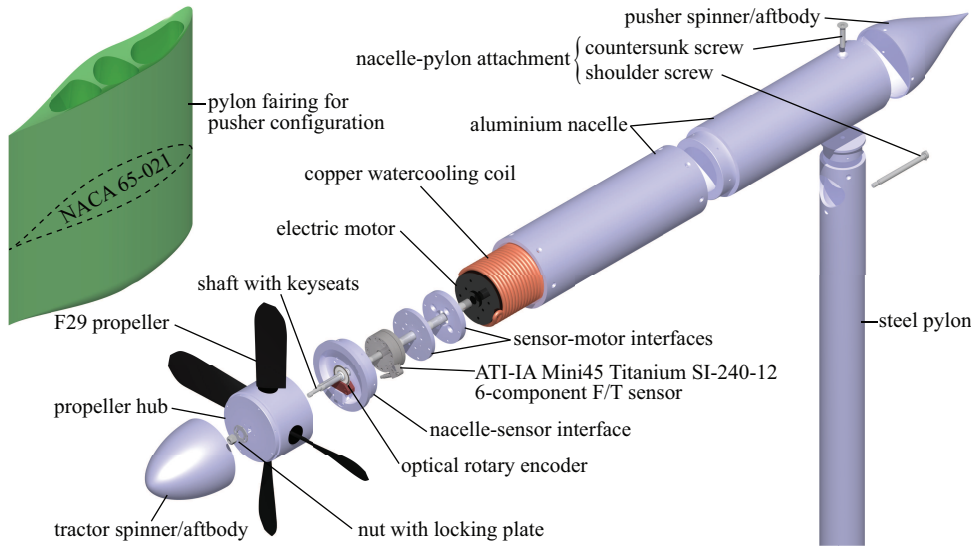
Exploded view of the F29 propeller unit A (with F/T sensor), indicating the various components.
